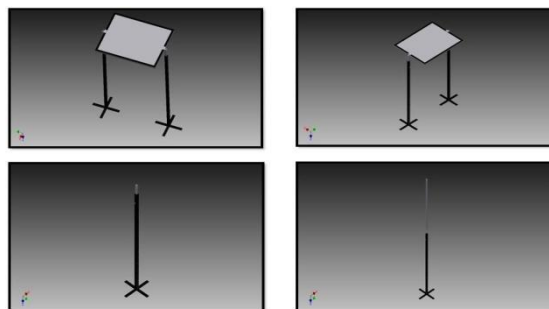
Three-Dimensional drawing of support stand mounted with Fresnel lens.
